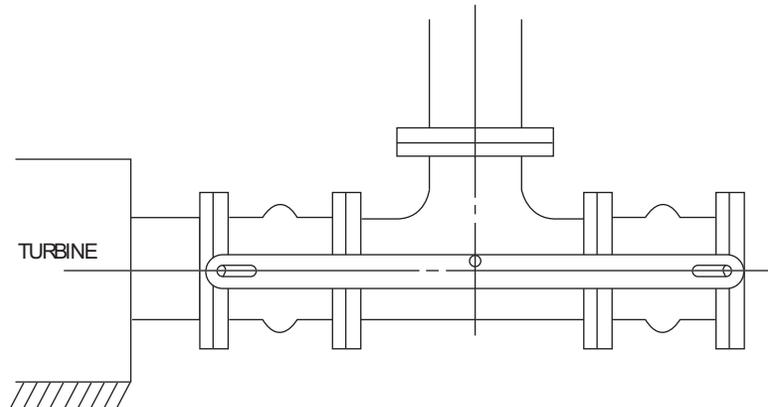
Exhaust Piping Expansion Joint Application Utilizing Tie Rods
